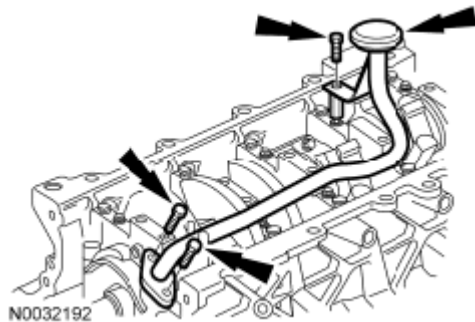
Locating Oil Pump Screen And Pickup Tube Bolts
